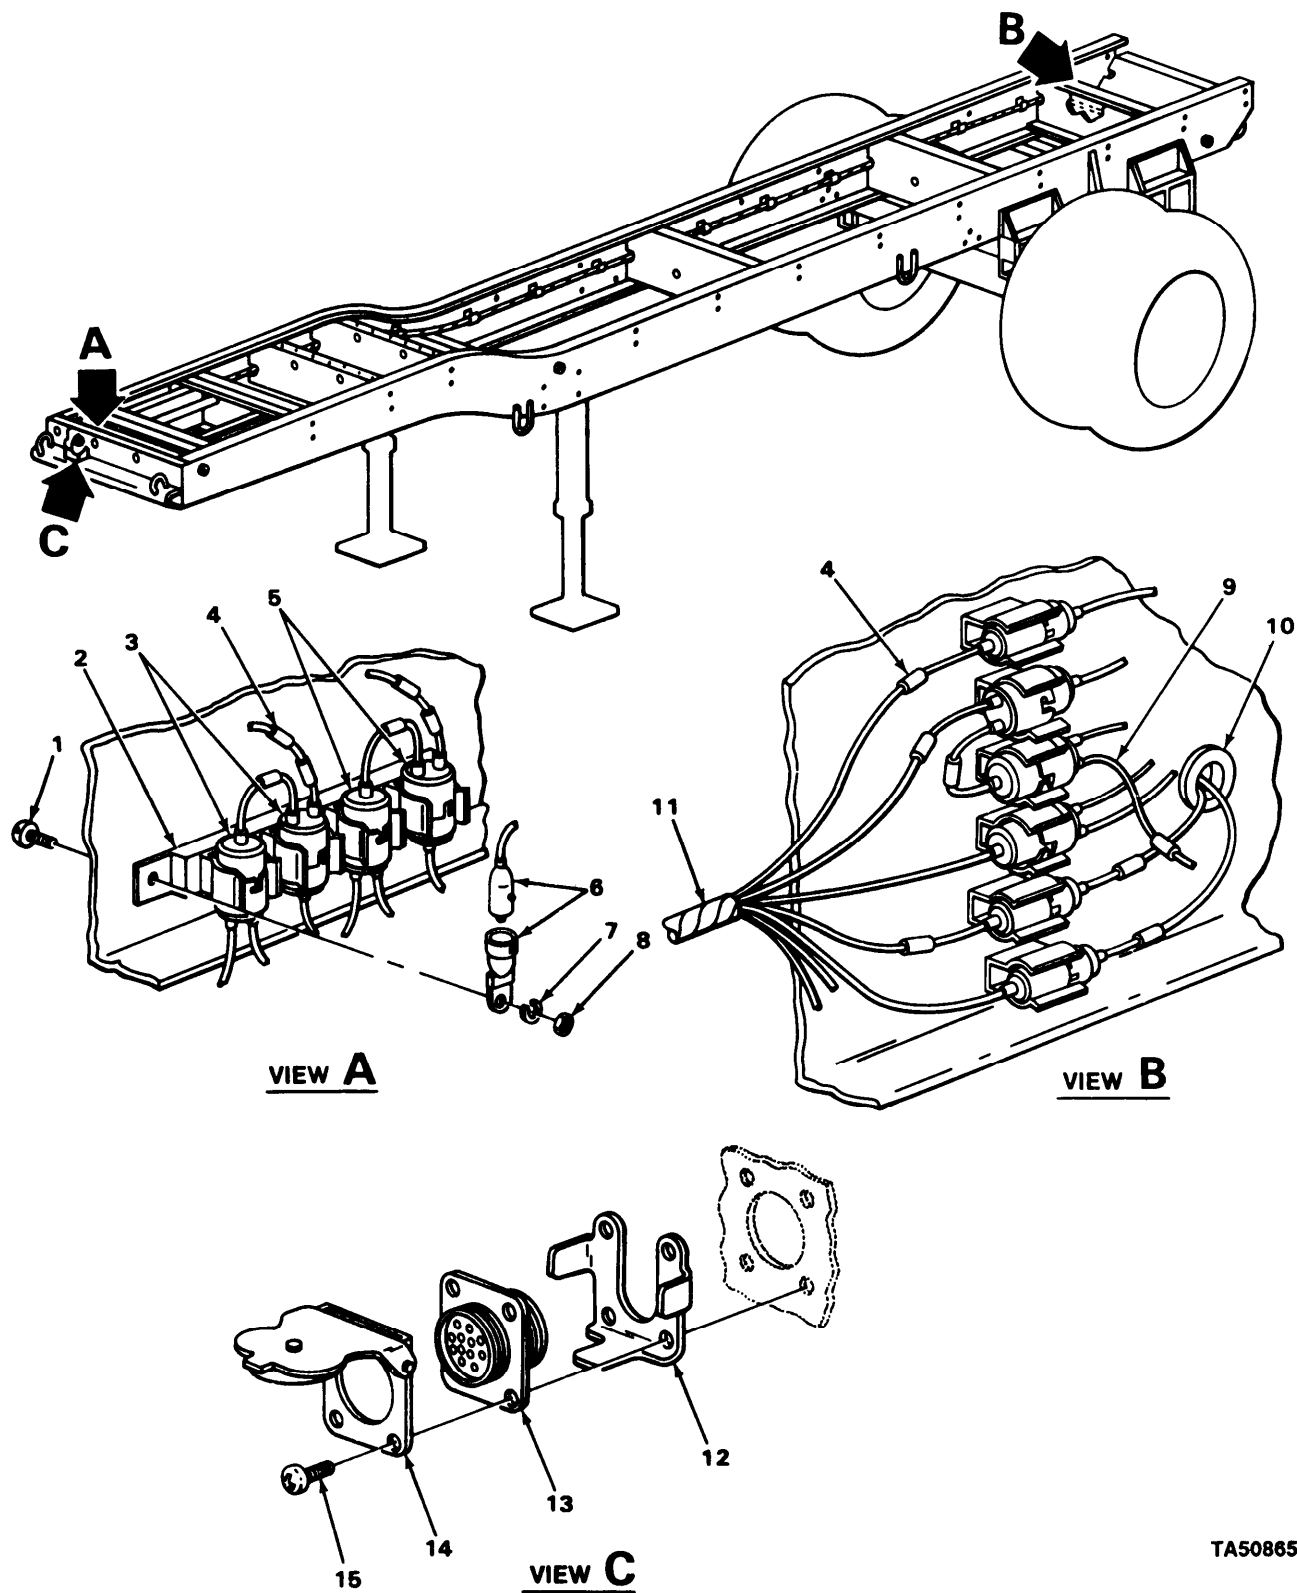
CHASSIS WIRING HARNESS (M119).
